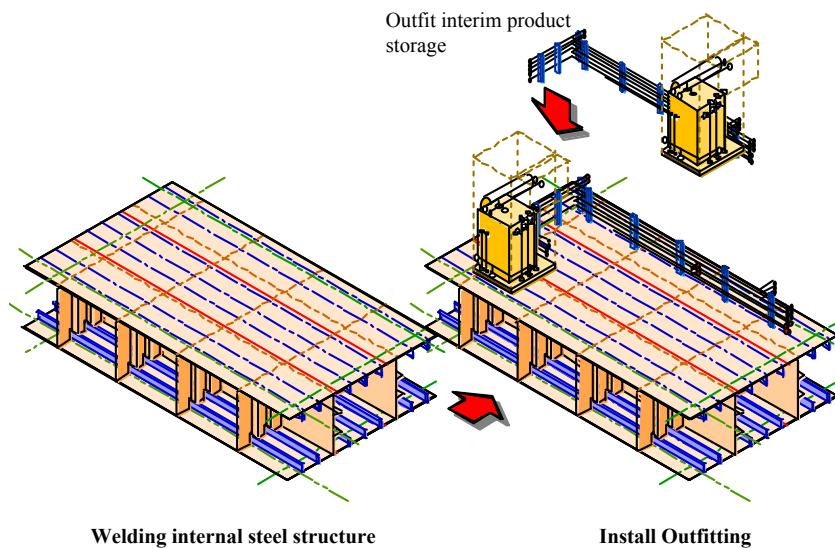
Welding and outfitting of built-up panel [2]
